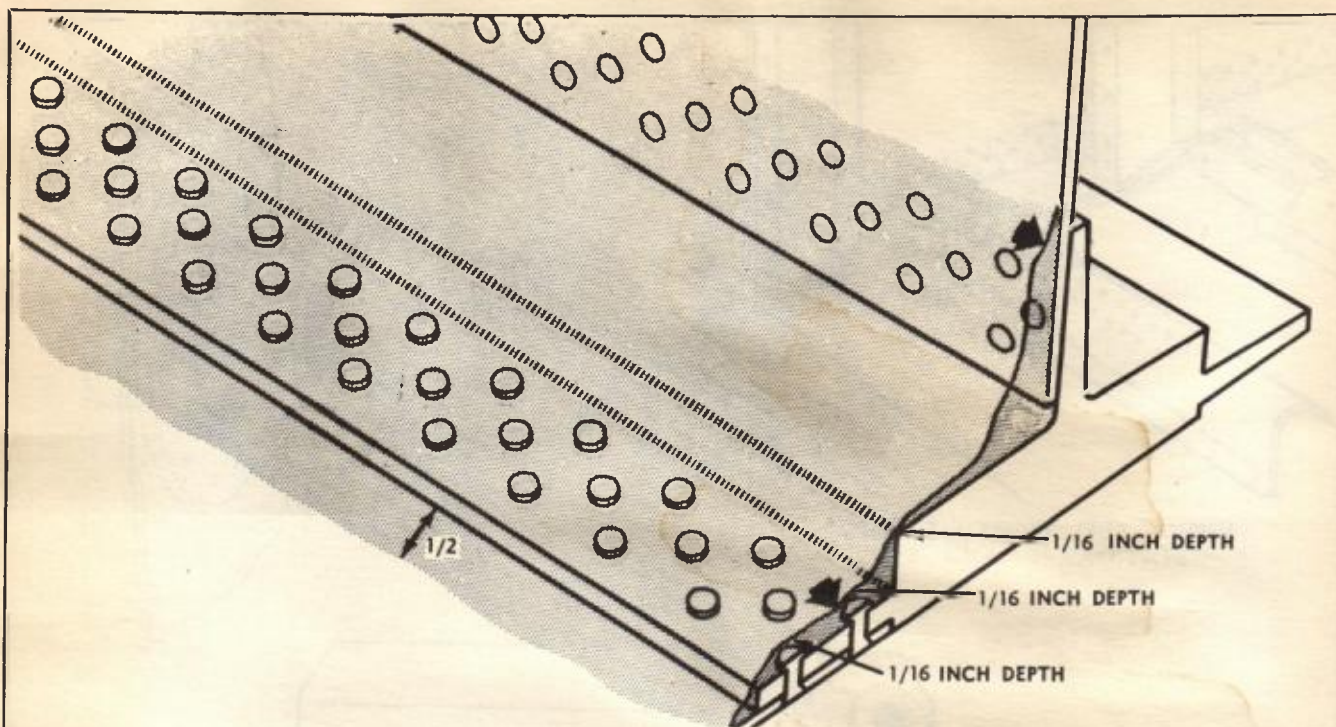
(Sheet 2 of 6 Sheets) — Fuel Tanks — Possible Leakage Areas
